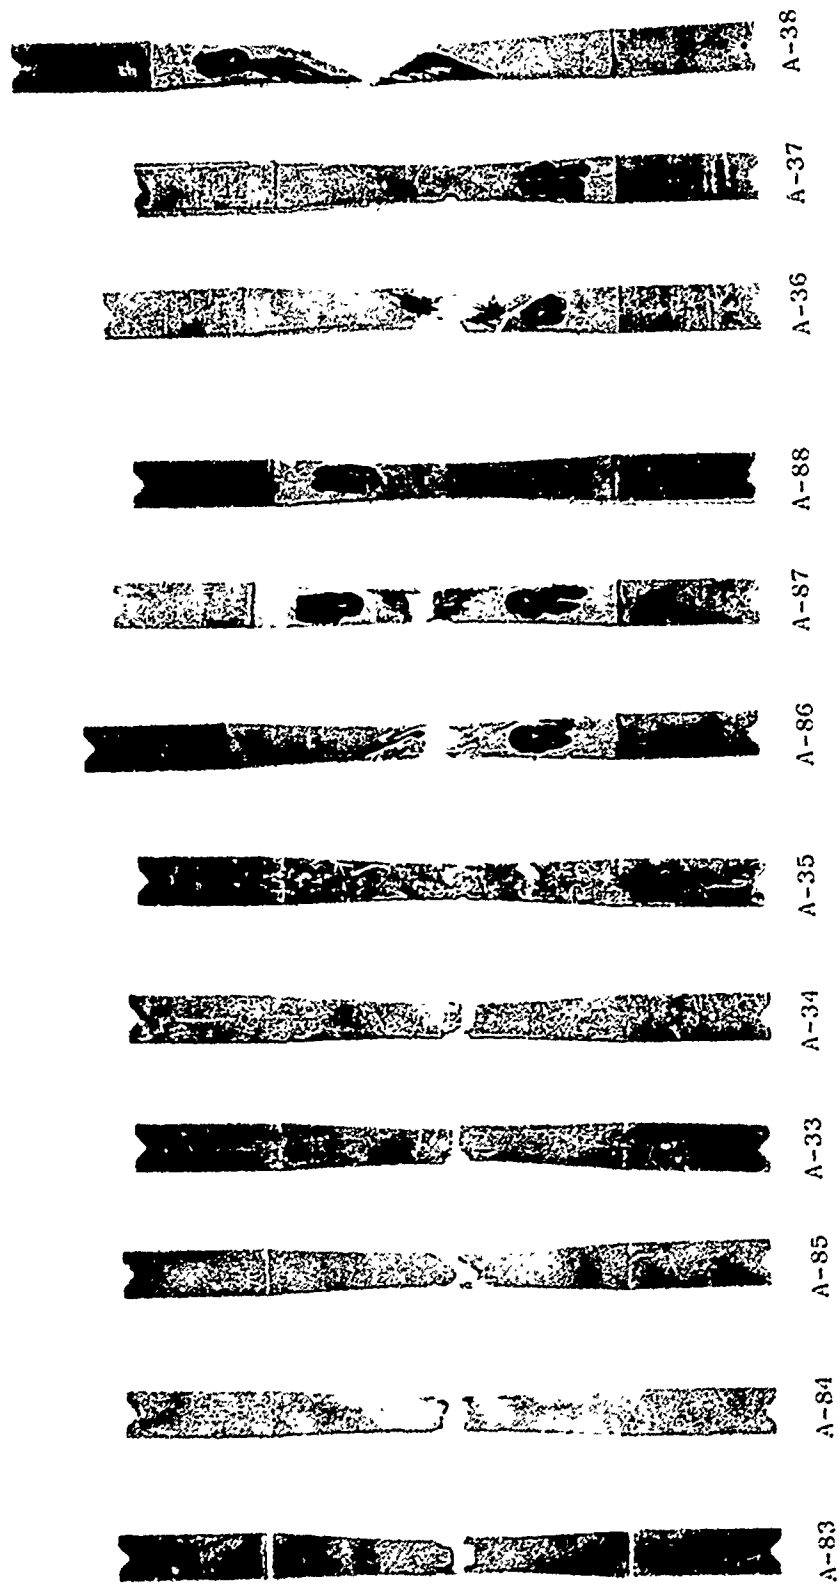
Double Edge Notched and Ballistically Impacted B/2024 Axial Fatigue Specimens After Testing at 75 and 600F
